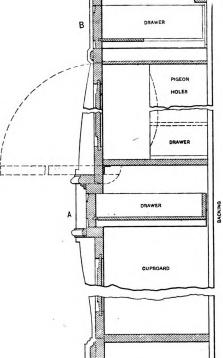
Section at D.—Scale, ¼ Inch to the Foot.
